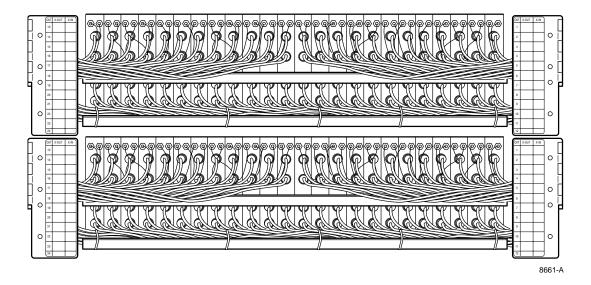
DSX-4U Chassis with Circuit Modules Installed (Rear View)
